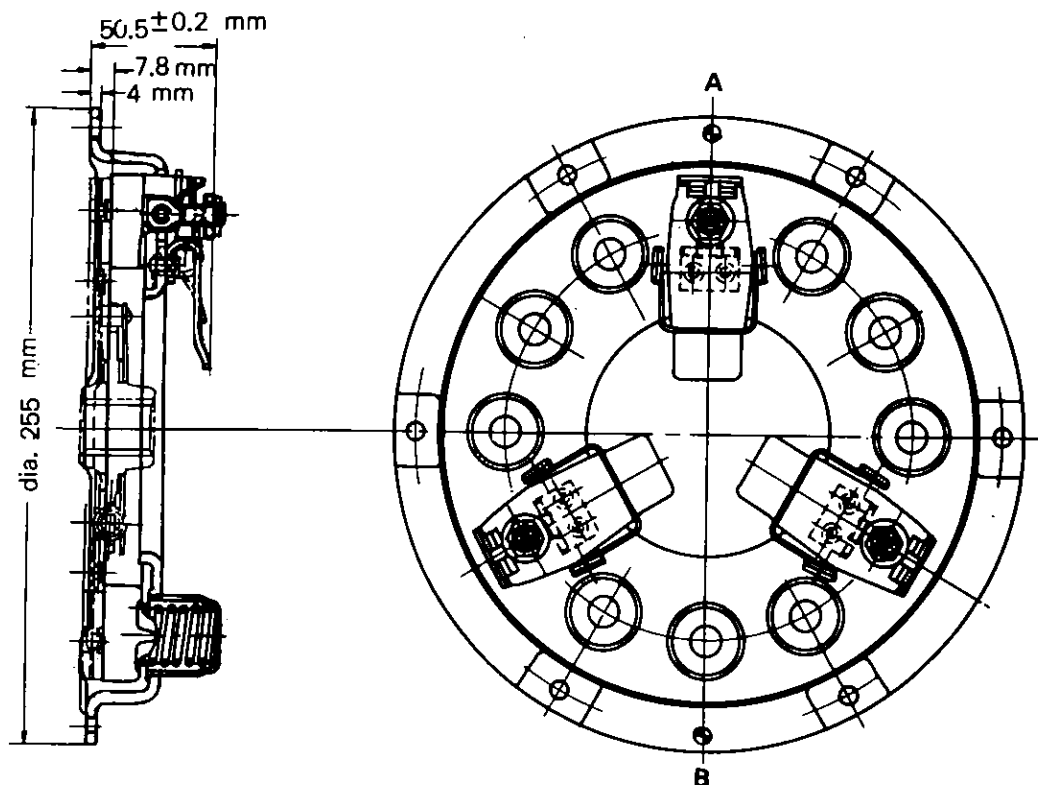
Clutch Cover Assembly (Coil Spring-Type)
